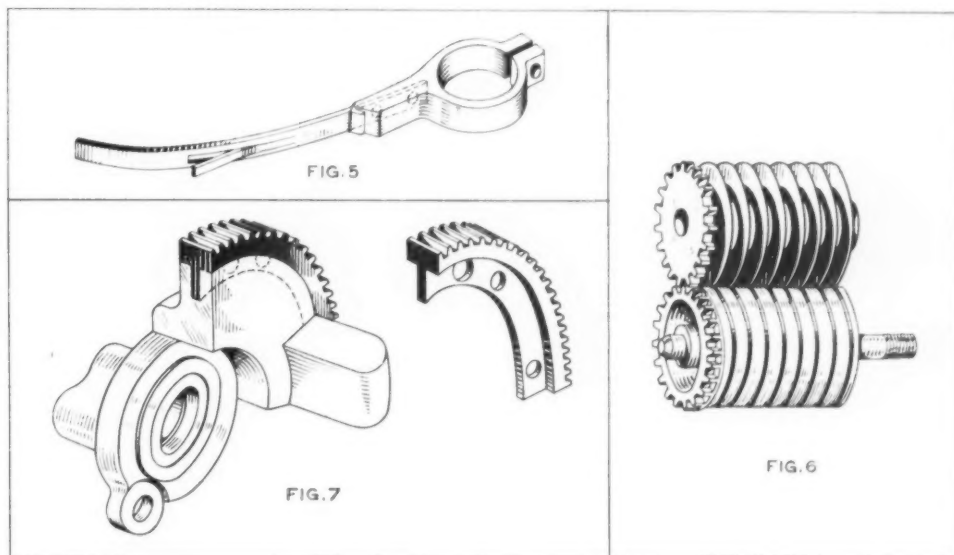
Flexible Steel Stamped Part Inserted in Zinc-alloy Split-hub Casting. Fig. 6. Eight Circular Steel Cutters for a Vegetable Slicer, Die-cast in Upper Part, Turn in Grooves in the Lower Drum which has a Steel Shaft Insert Cast in Place. The Gears are Cast Integral with the Die-castings. Fig. 7. Die-casting Having a Steel Gear Segment Cast in Place
